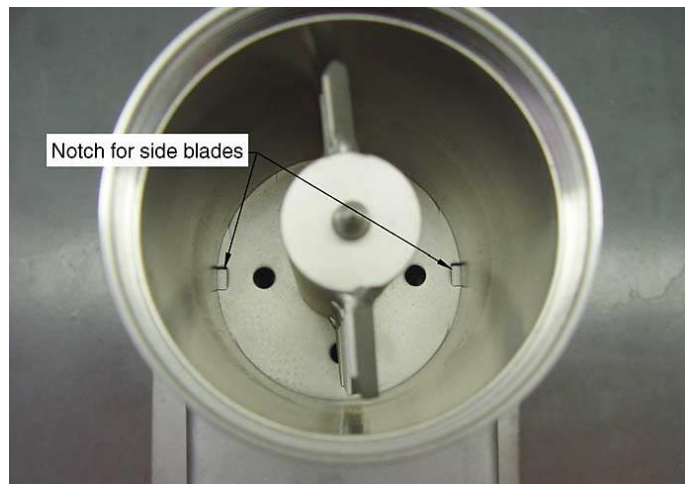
Center Paddle in Place (Top Support with Notch for Side Blades Shown)
